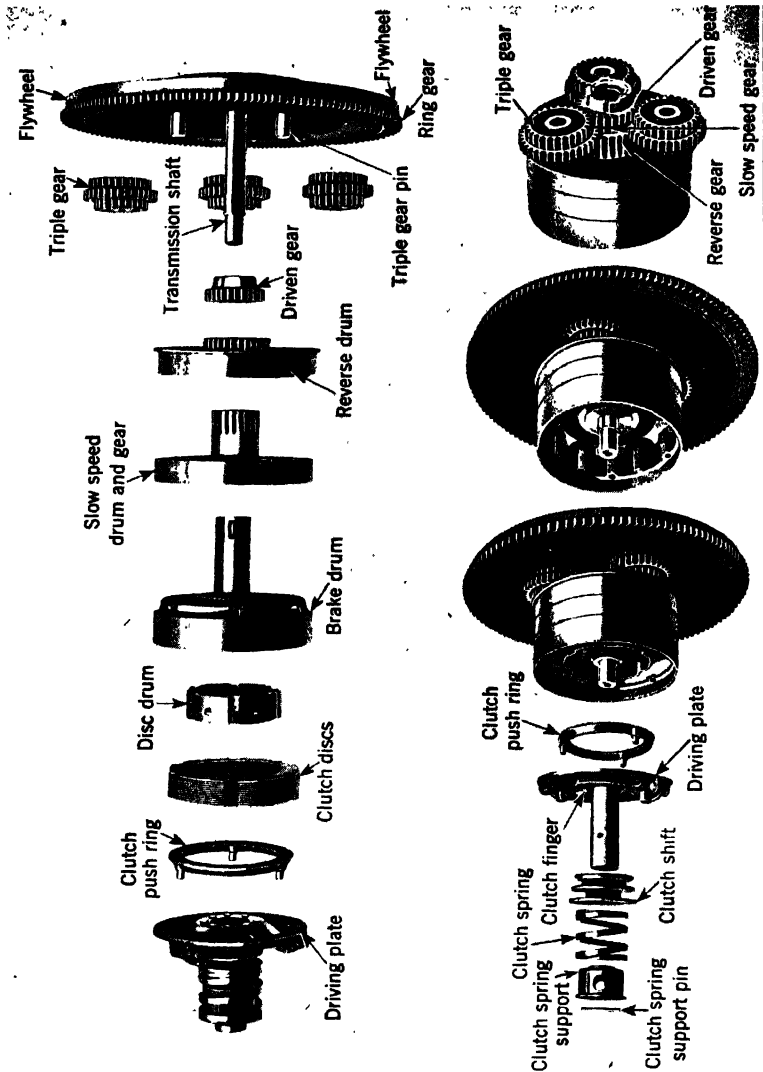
Ford Transmission Parts in Their Relative Assembling Positions. (Model T.)
